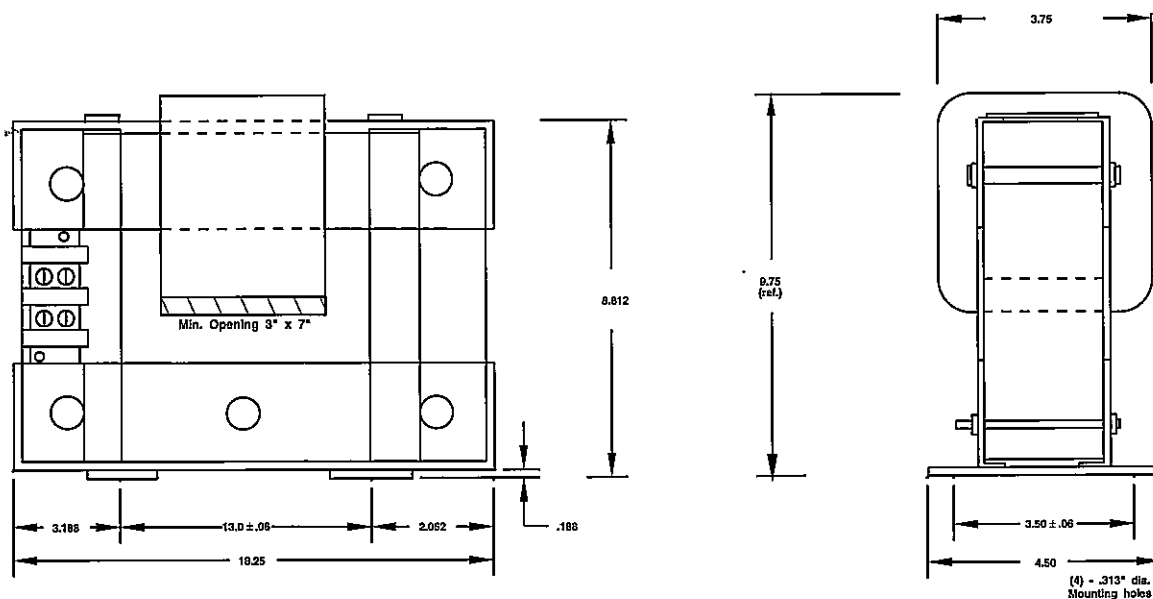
OUTLINE DRAWING BE 25930-001.
